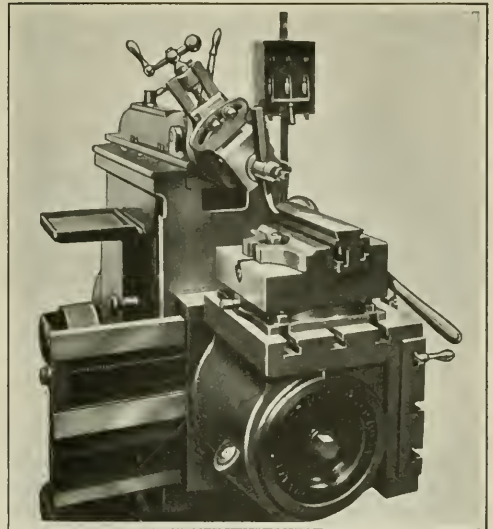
Planing Inclined Side Faces of Dovetailed Slide Bearing
